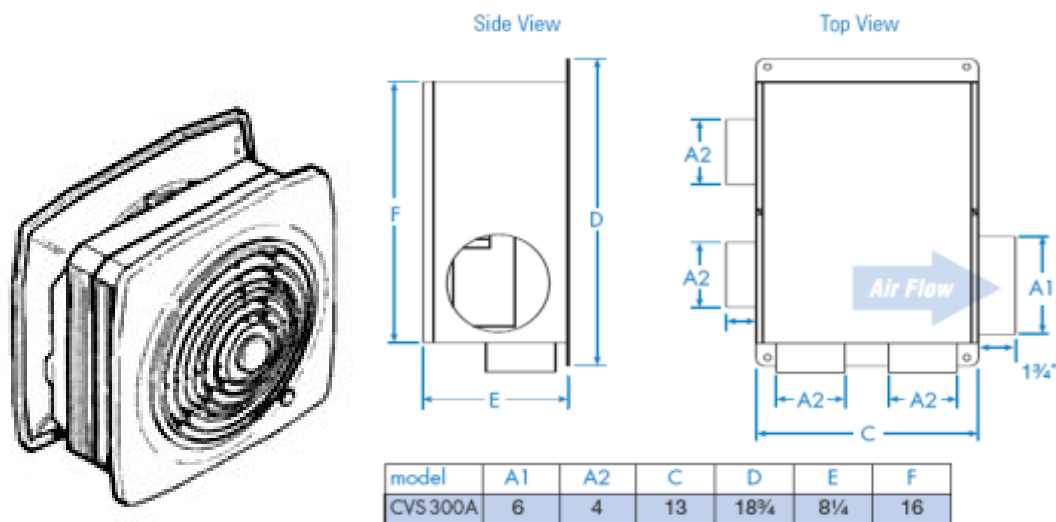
Proposed Engineering Controls: Interior Wall Fans - installed to help balance room temperature – Structural Designs for KEPH L 3-5 Kitchen Areas
